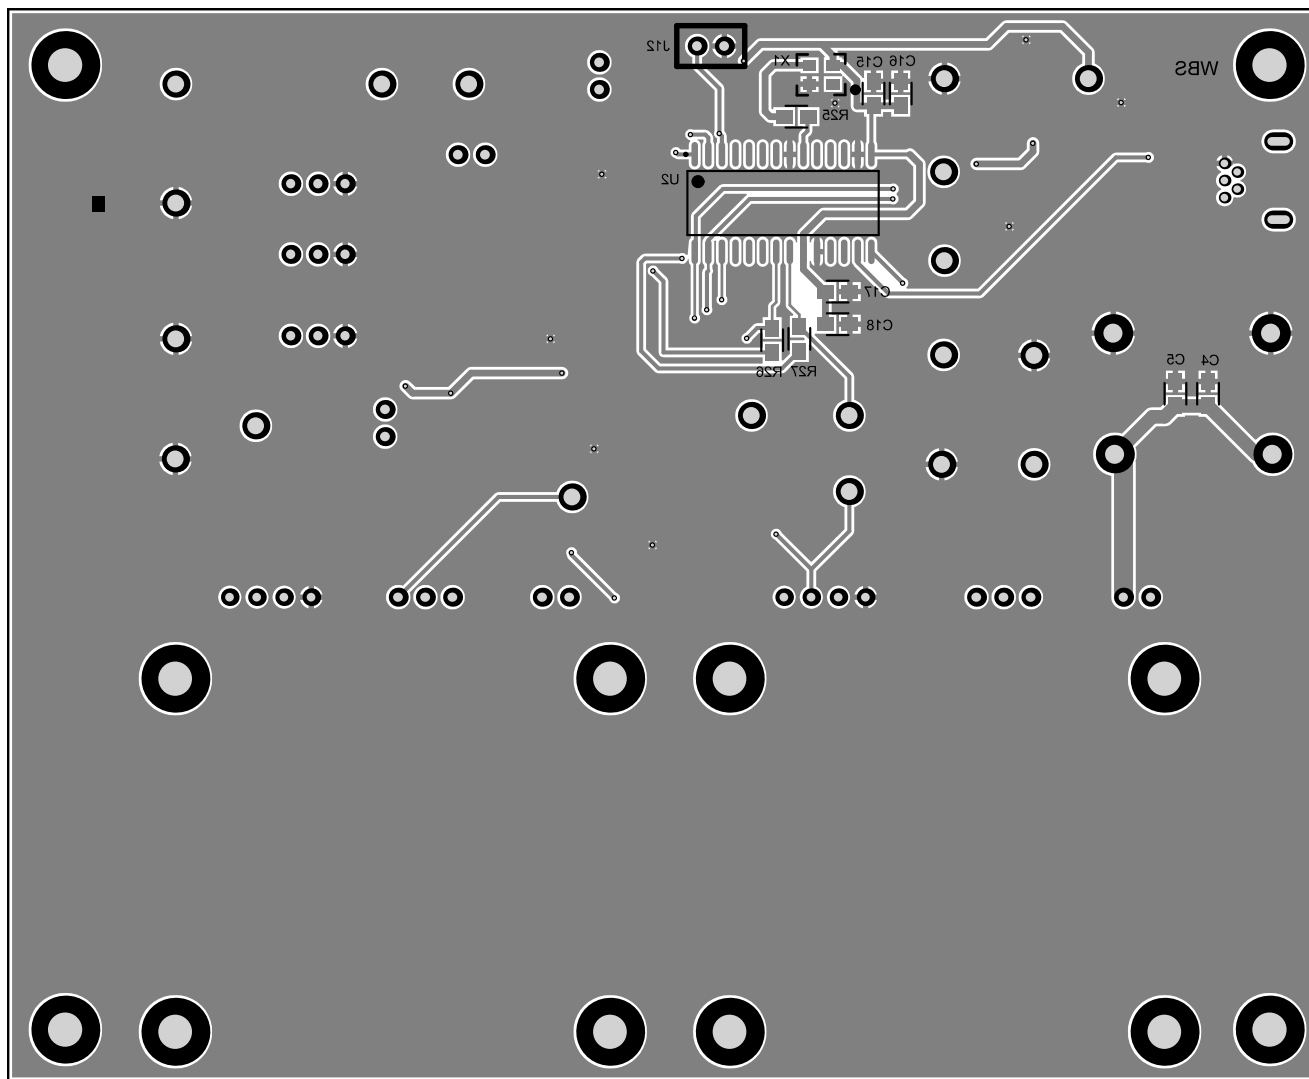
MAX31760 EV Kit PCB Layout—Bottom
